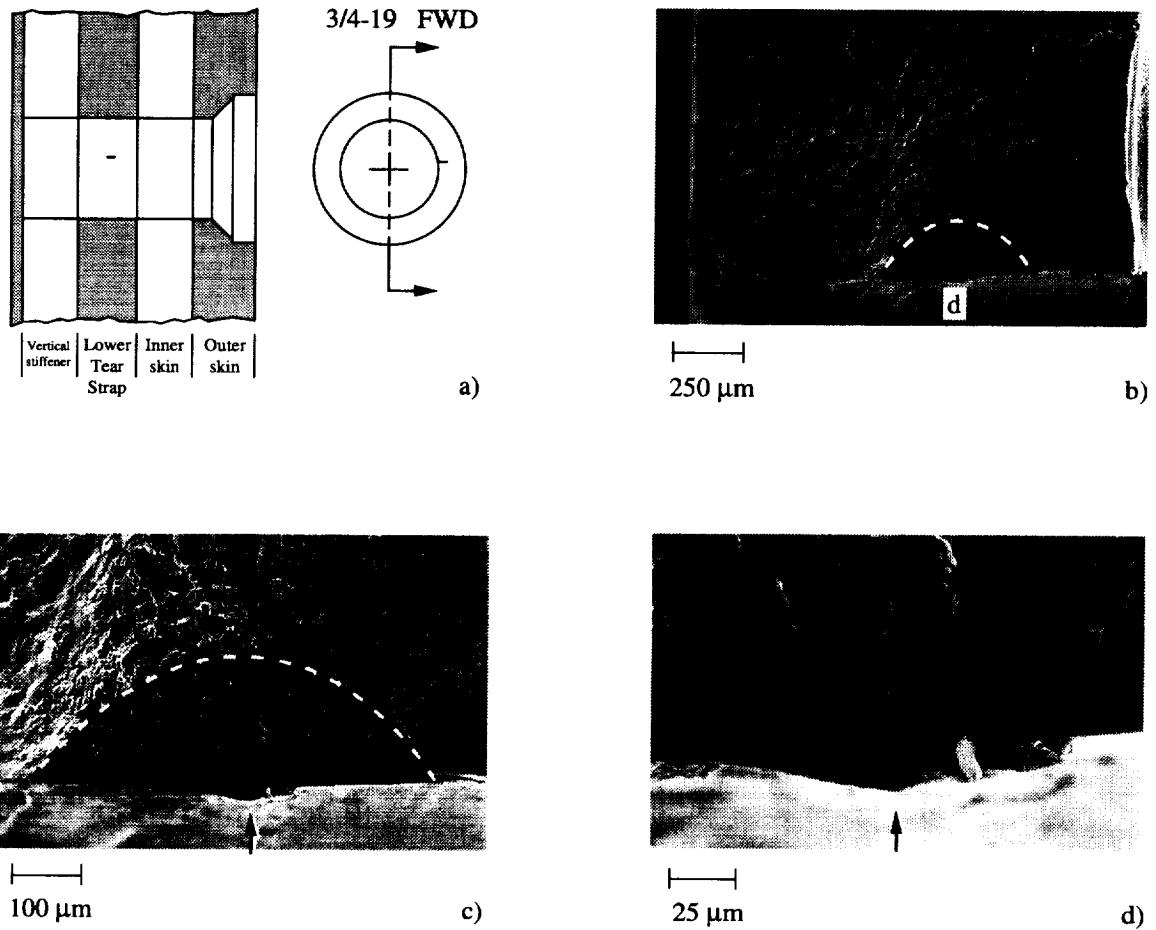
a) The schematic shows the rivet hole 3/4-19 configuration and the location of the lower T.S. fatigue crack oriented in the forward direction and above the 3 o'clock position. b) The SEM micrograph shows the fracture surface of the fatigue crack located on the inside surface of the lower T.S. rivet hole. The dashed line marks the fatigue crack front. c) The SEM micrograph shows the surface fatigue crack located at region "d" in Figure 10.34.b. The arrow marks the site of crack initiation and the dashed line marks the fatigue crack front. d) The SEM micrograph shows the crack initiation site (arrow) at high magnification.
